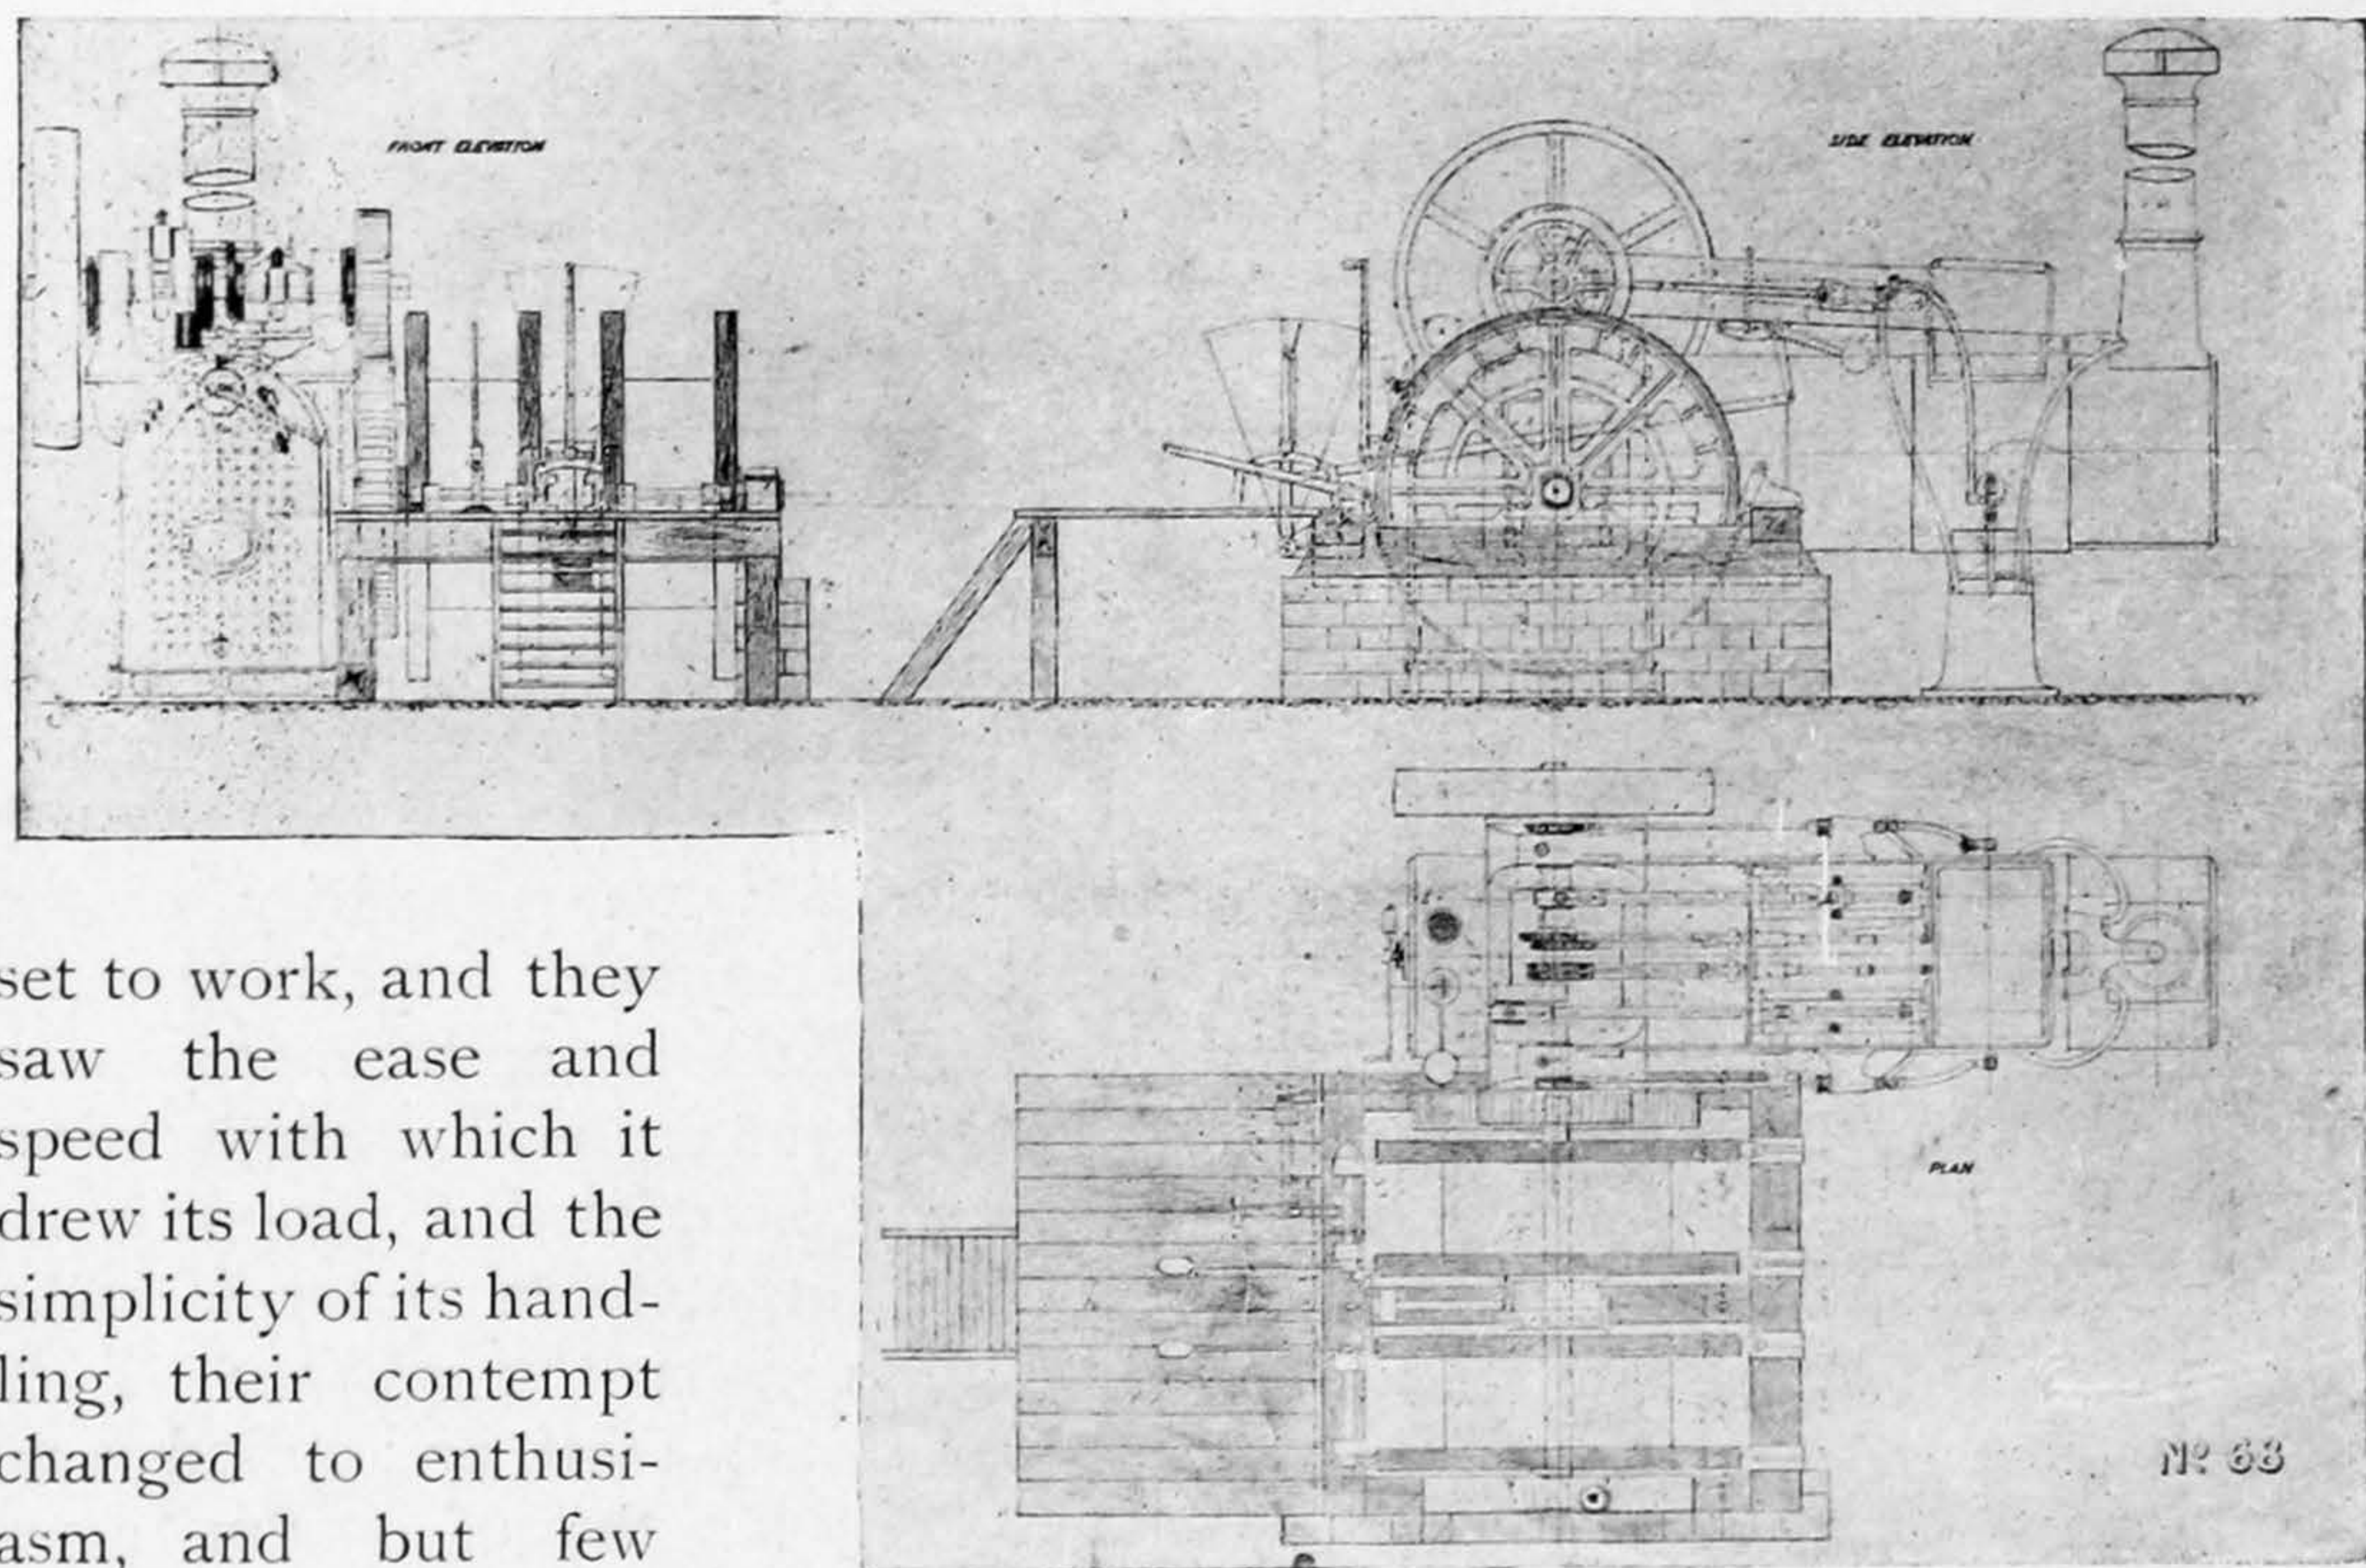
FRONT AND SIDE ELEVATIONS AND PLAN OF POWERFUL ENGINE BUILT IN 1872.
